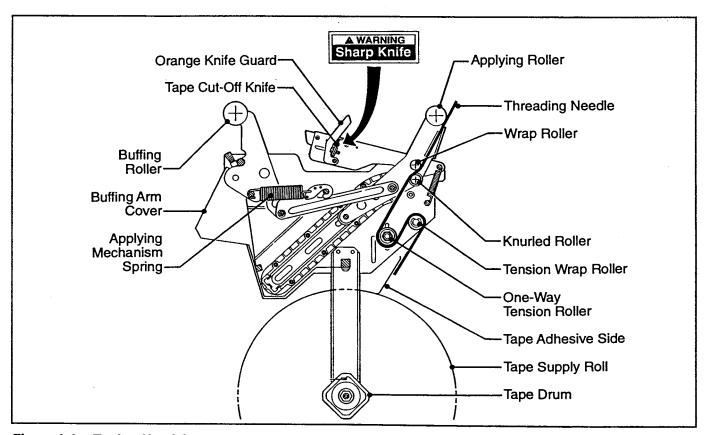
Taping Head Components/Threading Diagram - Lower Head (Left Side View)
